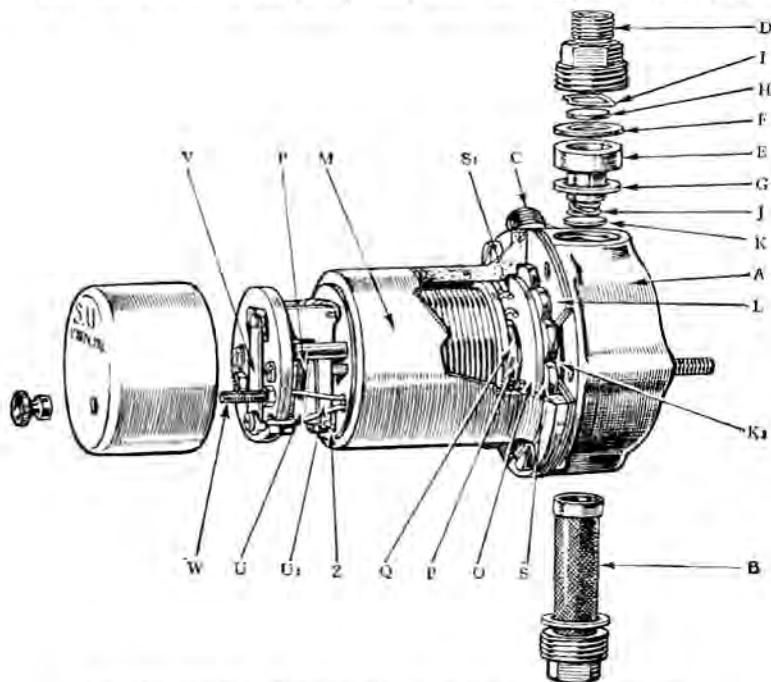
THE S.U. ELECTRICAL PETROL PUMP IN PART SECTION
